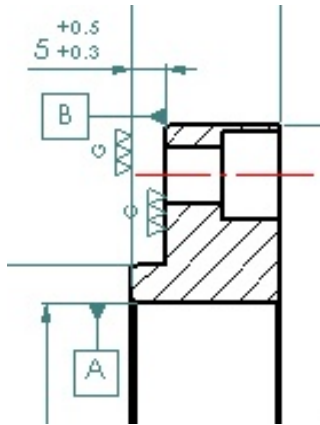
The manufacture precision requirement information in the engineering drawing file of the SolidWorks CAD software.
